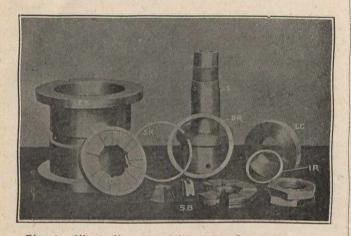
Illustration of a Michell Bearing for a Steam Turbine.
